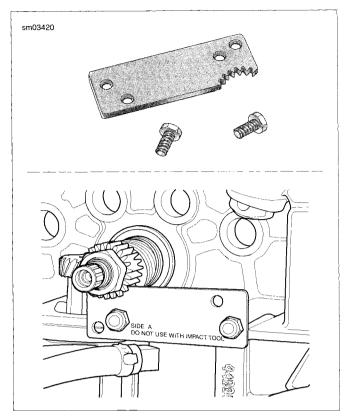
Crankshaft Locking Tool (Part No. HD-43984)
